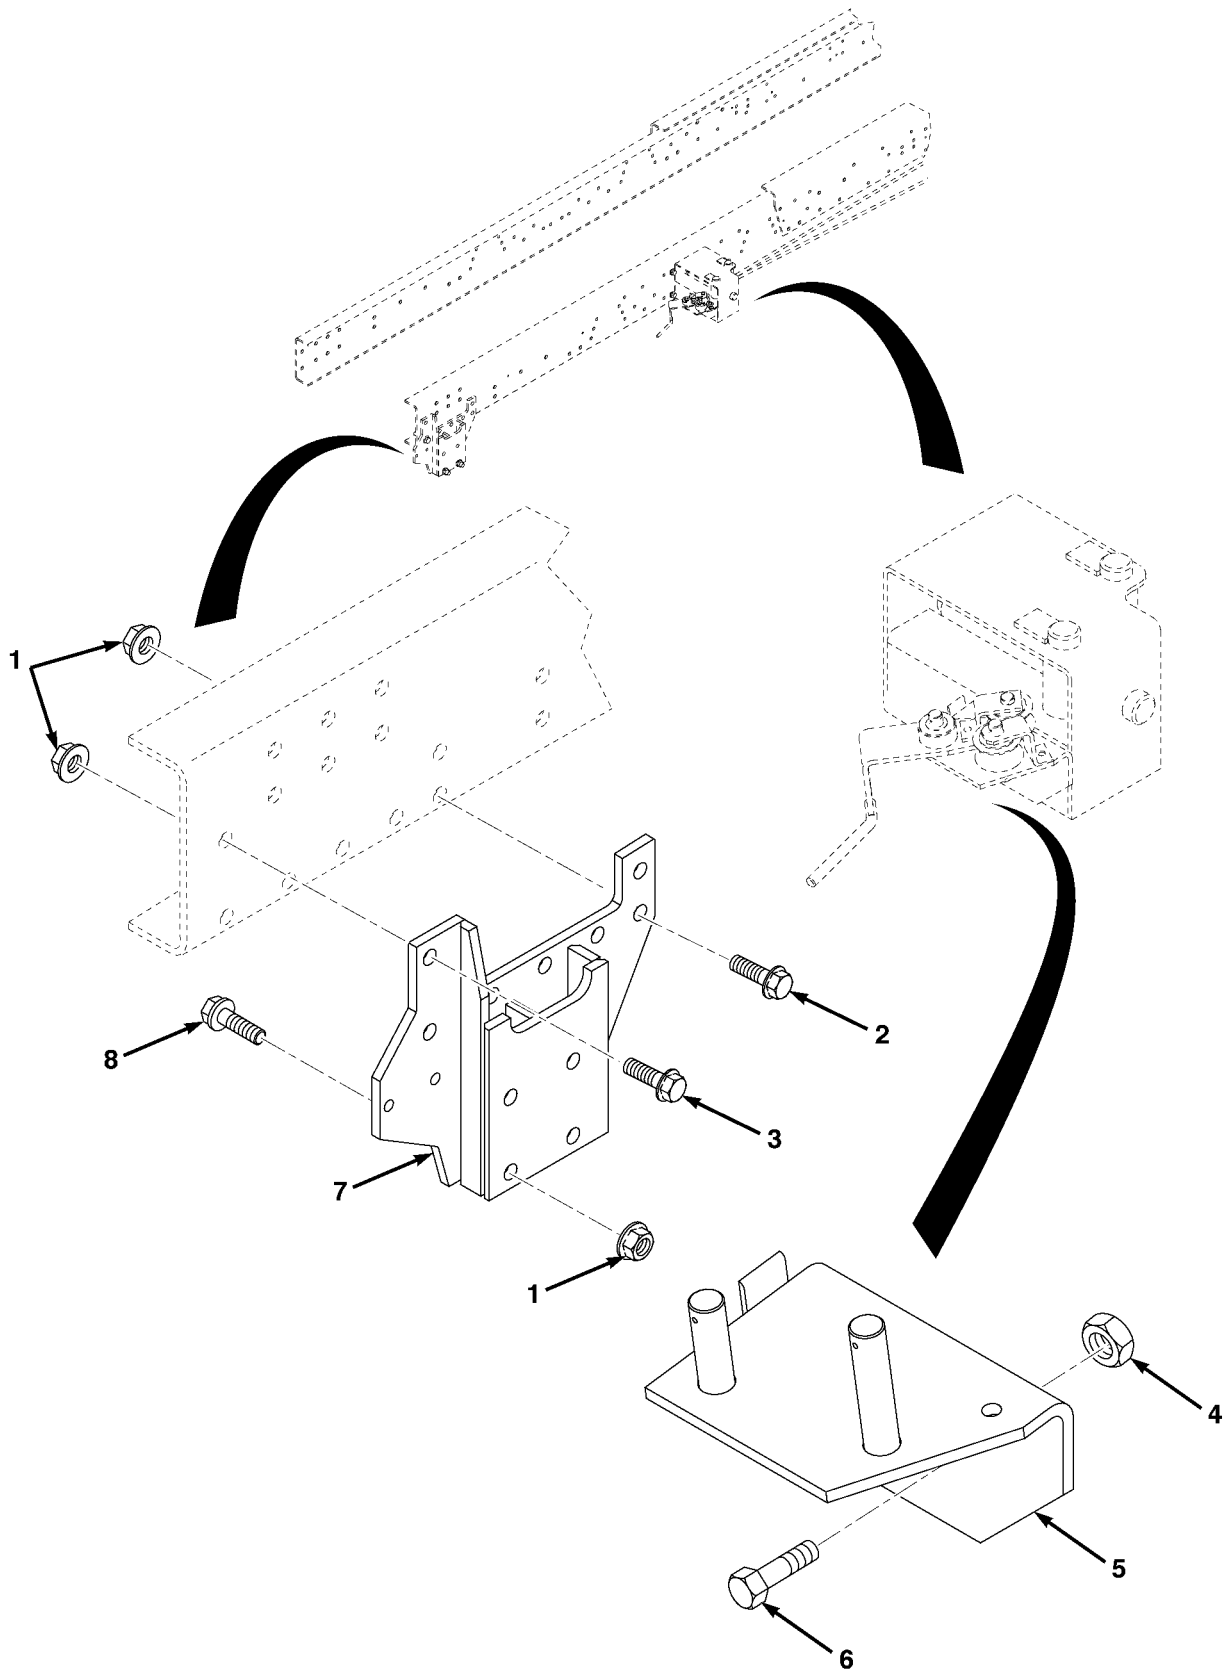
SELF RECOVERY WINCH ASSEMBLY
